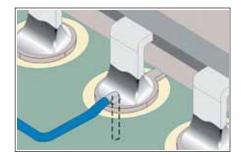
Acceptable* Wire soldered into plated-through hole, component side.
